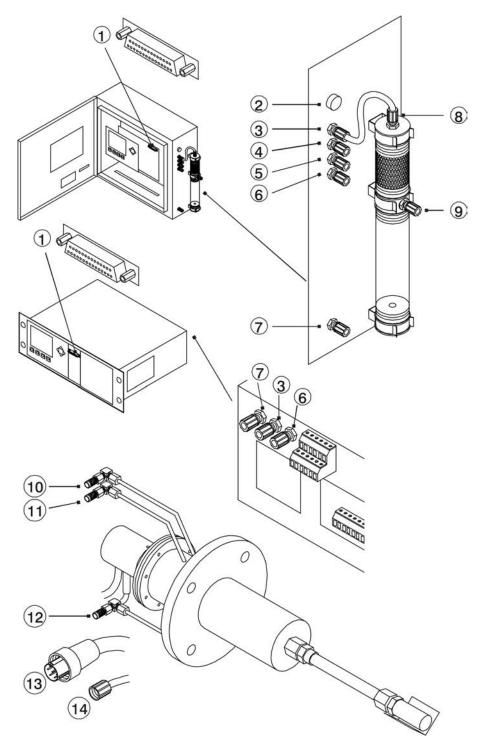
Mounting principle of the with external pump and calibration device into PCB
